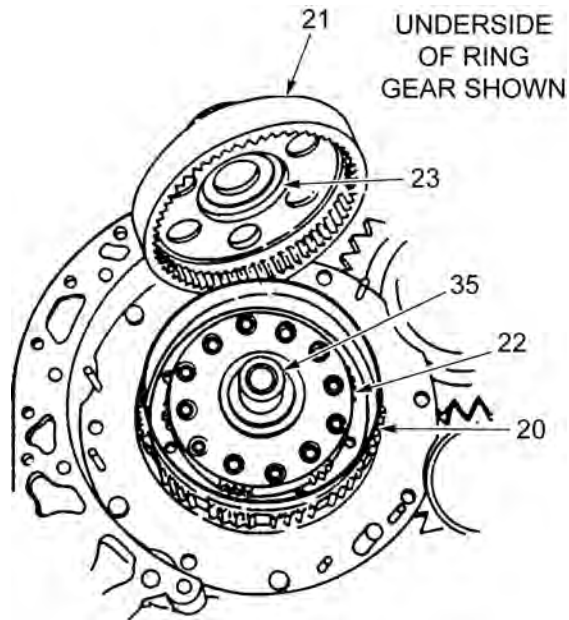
Brake Clutch Drum and Steer Ring Gear Assembly Installation.
